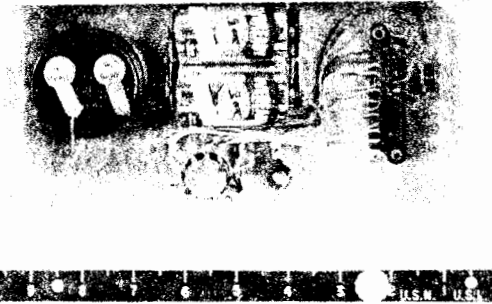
Switch-Stack Assembly Test Set, Bottom View
